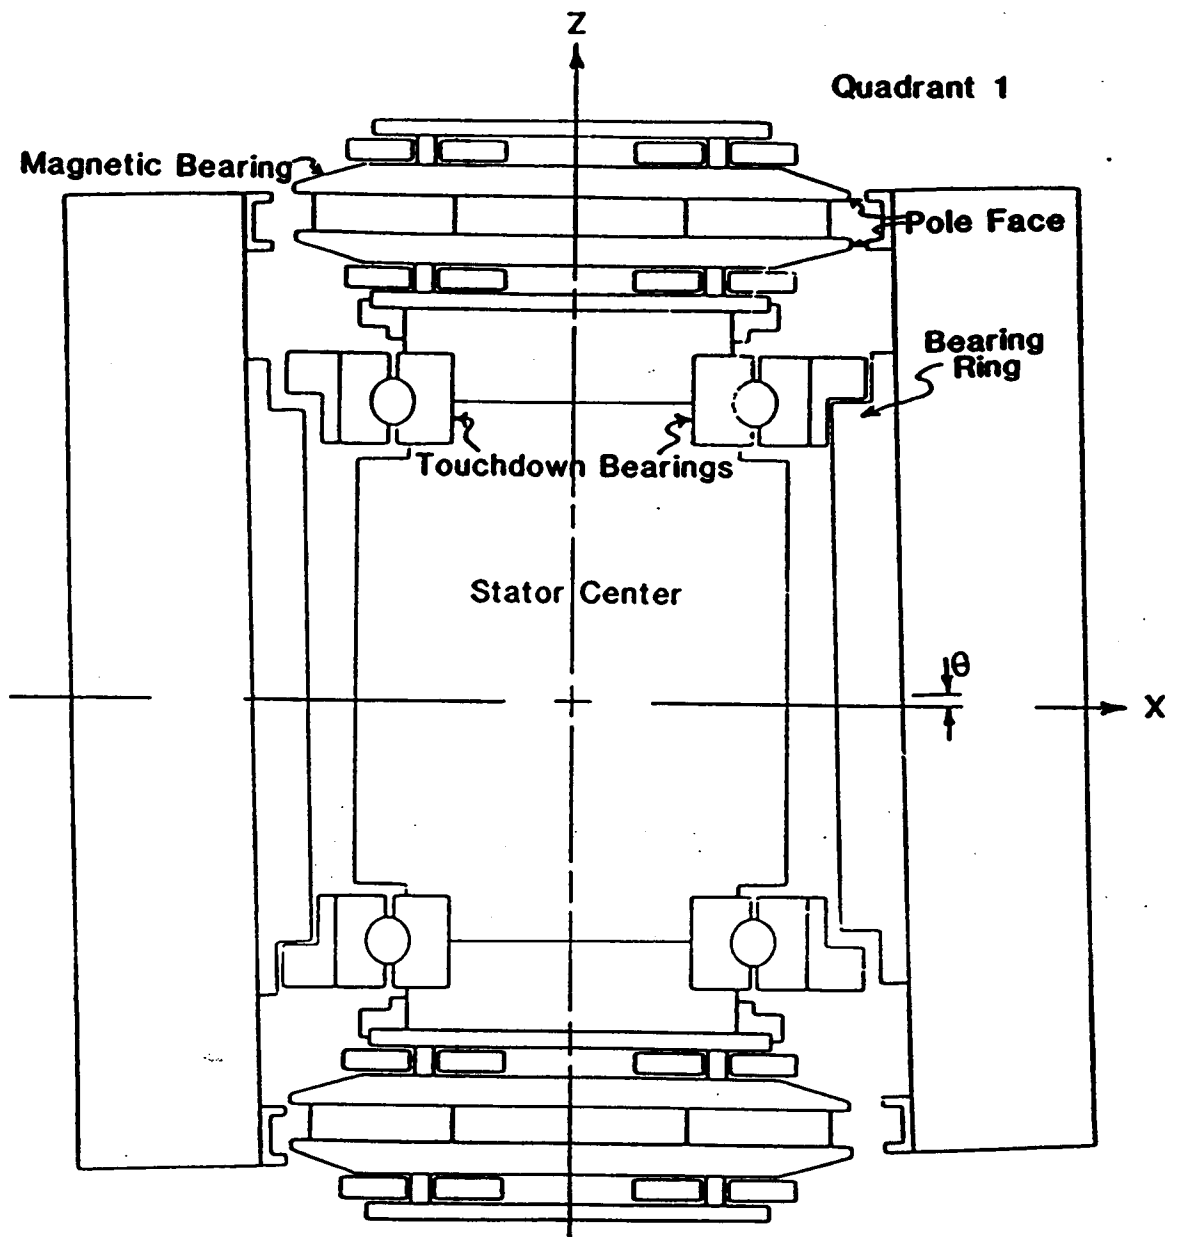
Touchdown Bearing design for the University of Maryland Flywheel System.
